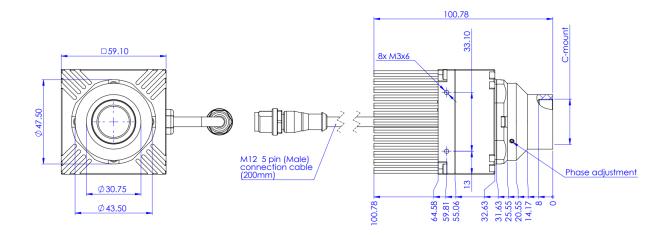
Linear dimensions of the device hardware for LT2PRXP.
